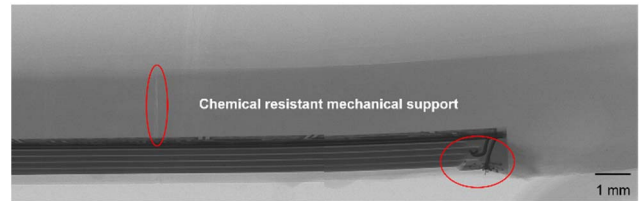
2D X-ray image of the cross-section of the four-die stacked package encapsulated in CR mechanical support after sample preparation. Crack in the mechanical support after curing and die crack are encircled in red.
